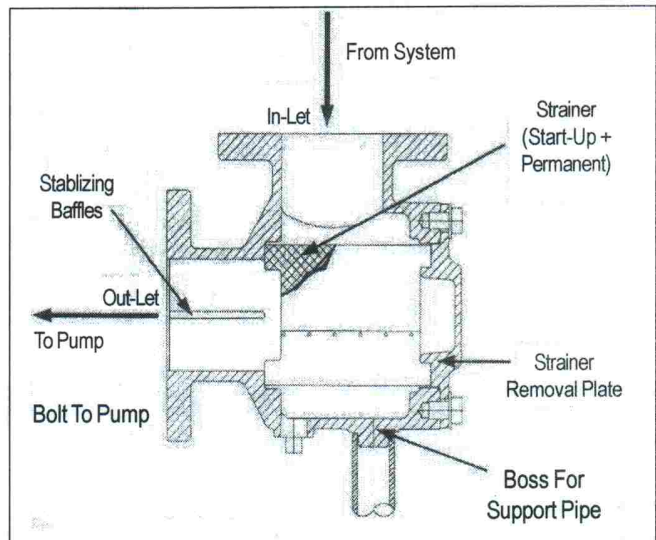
Sant Suction Guides may be unstalled in any arrangement feasible by pump flange bolt holes arrangement.
